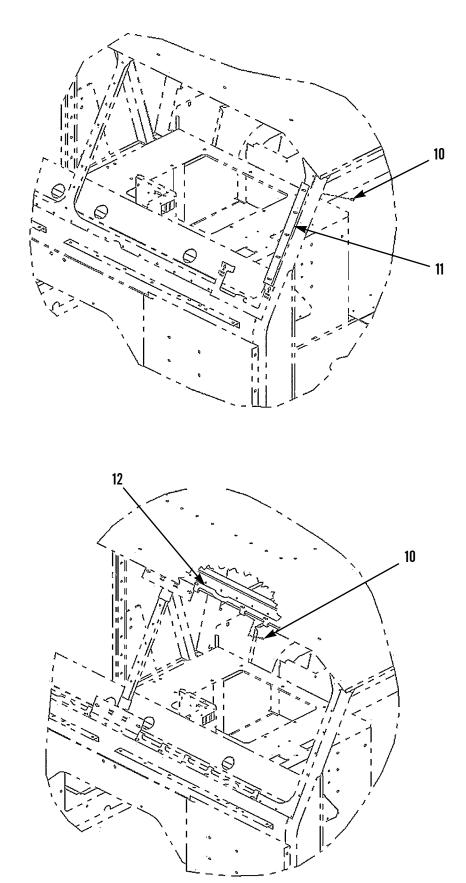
Windshield Armor Kit and Mounting Hardware (Sheet 2 of 4)
